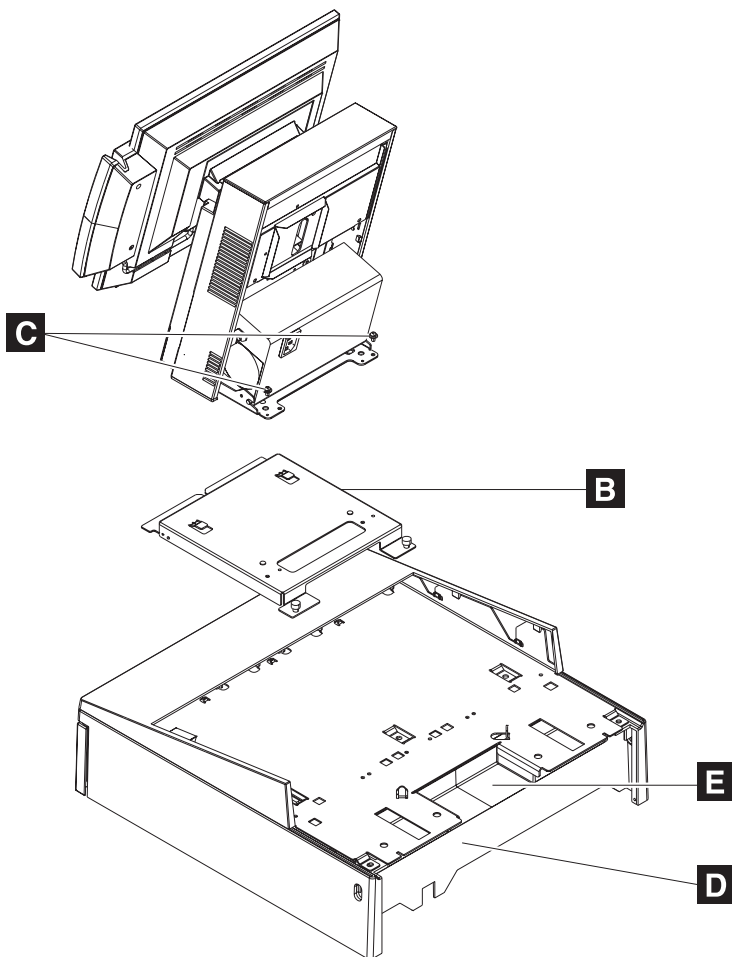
Attaching a mounting plate to center of cash-drawer integration tray
